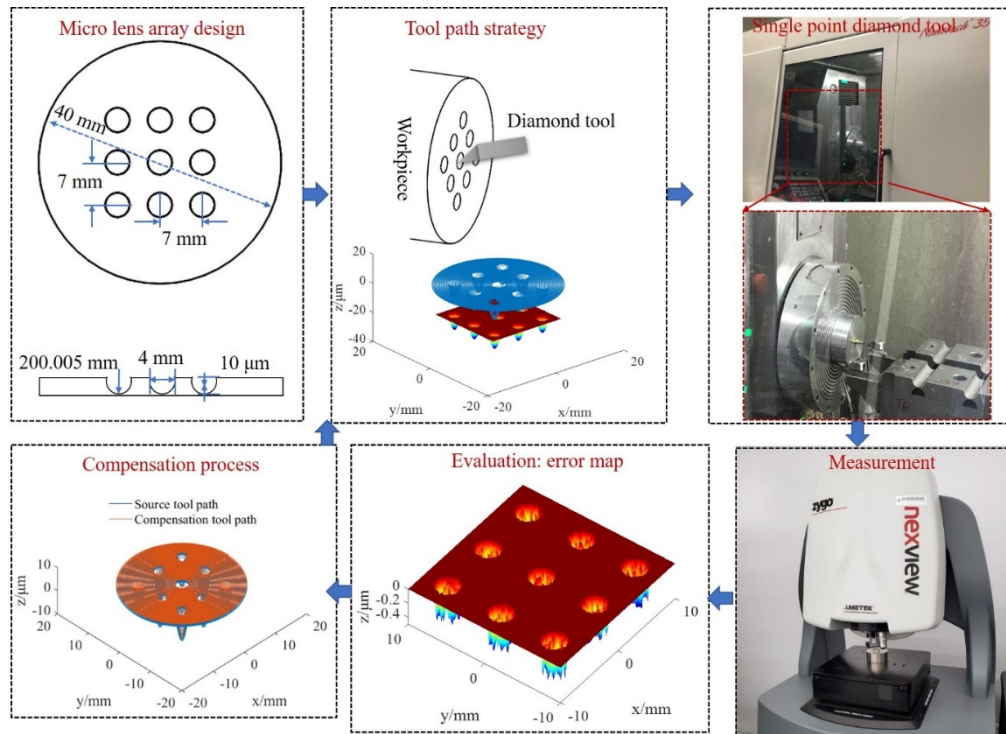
Process chain for fabrication of MLAs using an ultra-precision machine tool.
